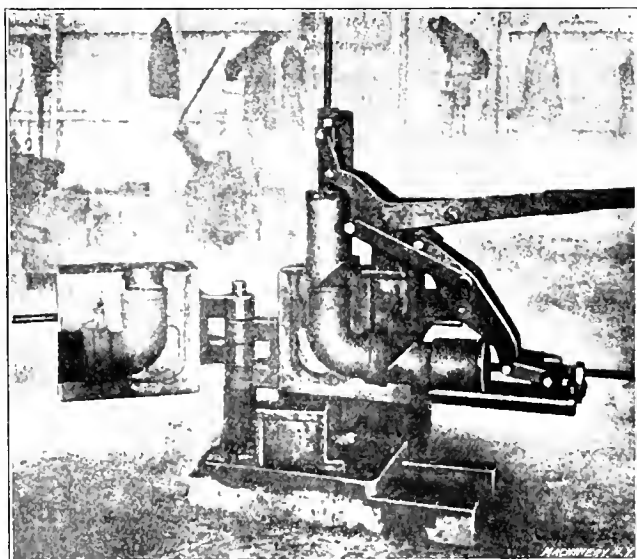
Casting poured, Cores withdrawn and Mold opened, showing the Pipe Fitting
